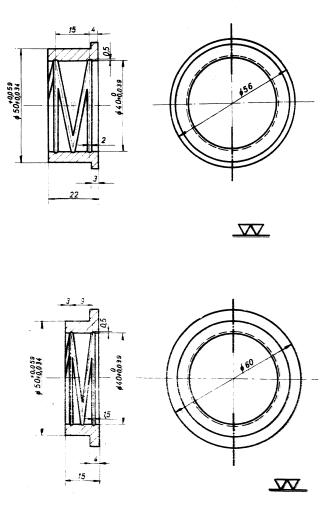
BRONZE BEARINGS — SPRING DEVICE
